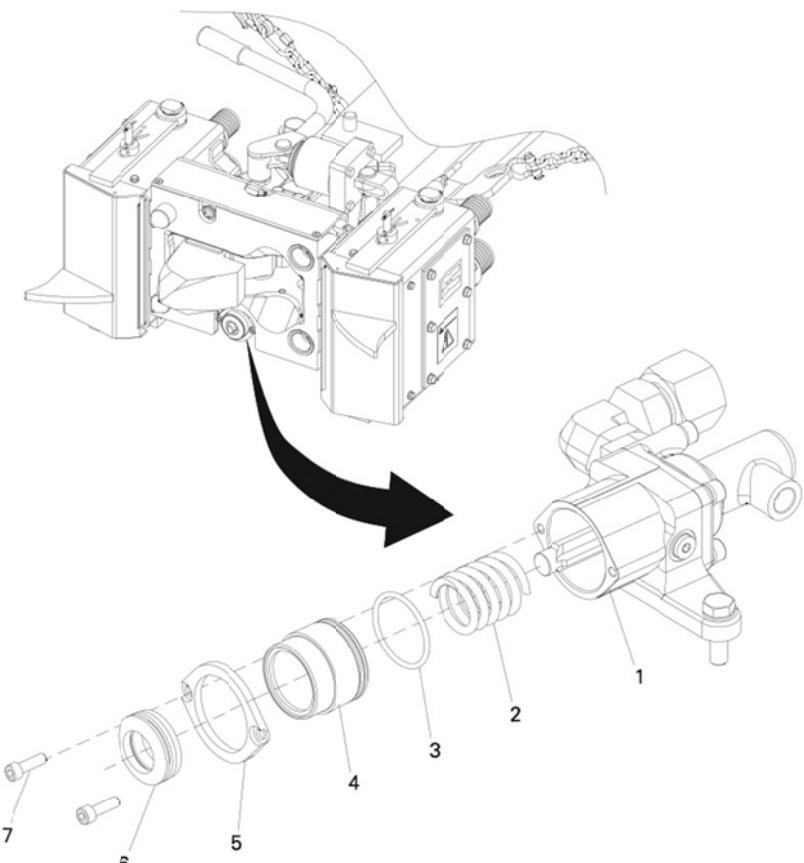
MRP VALVE FRONT SEAL REPLACEMENT
